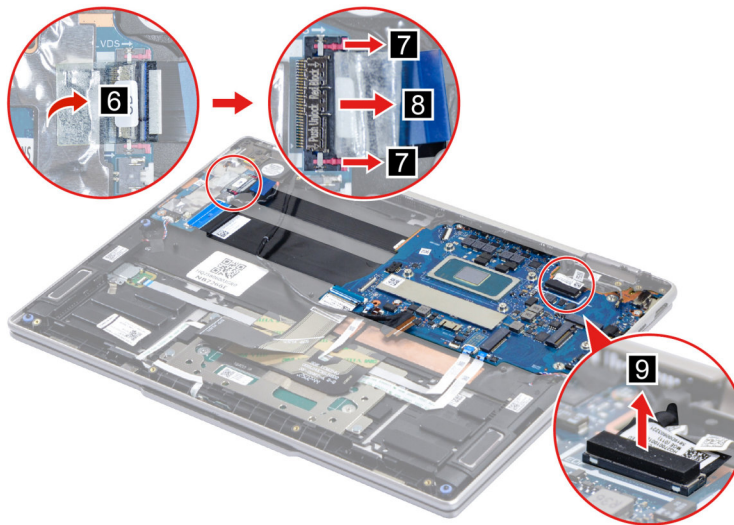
Disconnect the LVDS cable connected to the I/O board and disconnect the EDP cable from system board (Intel models)
